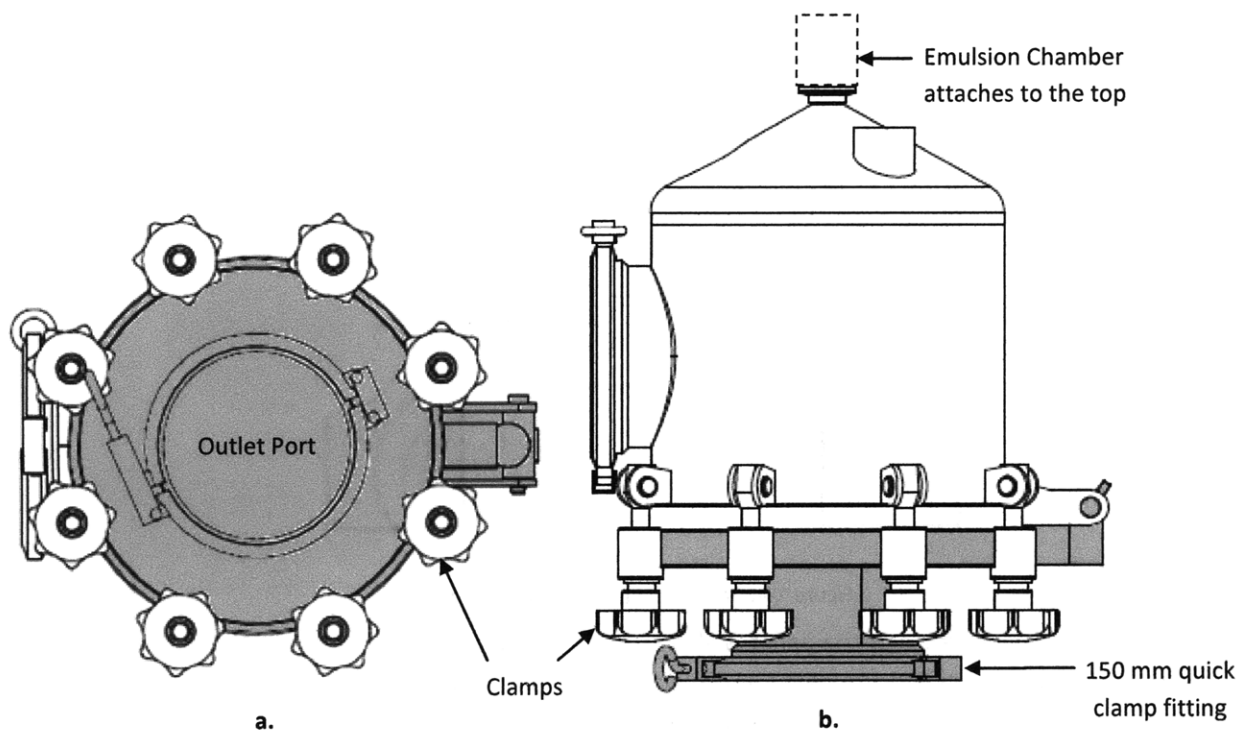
Drawings of the a.) Bottom and b.) Side Views of the Ice Confection Tank
